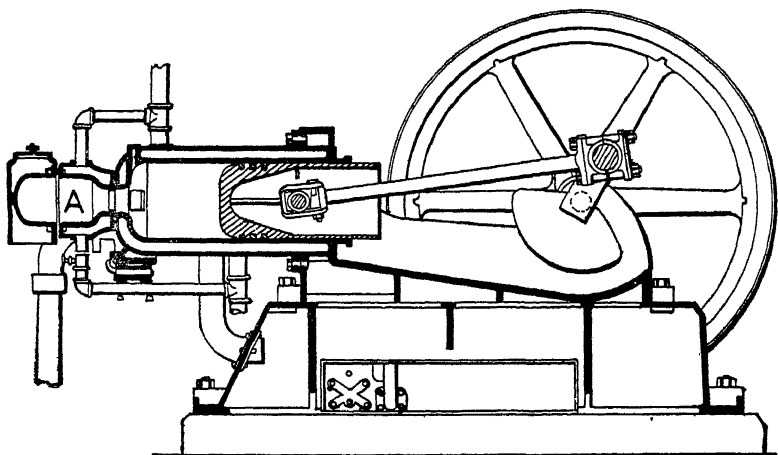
HORNSBY-AKROYD OIL ENGINE.
